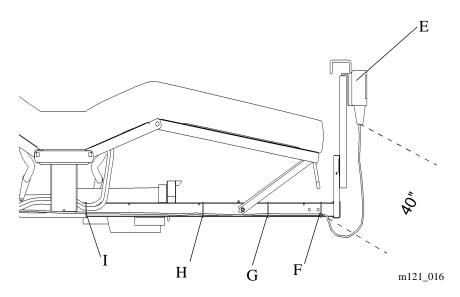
Bed Equipped With a Spring Fabric Sleep Surface
